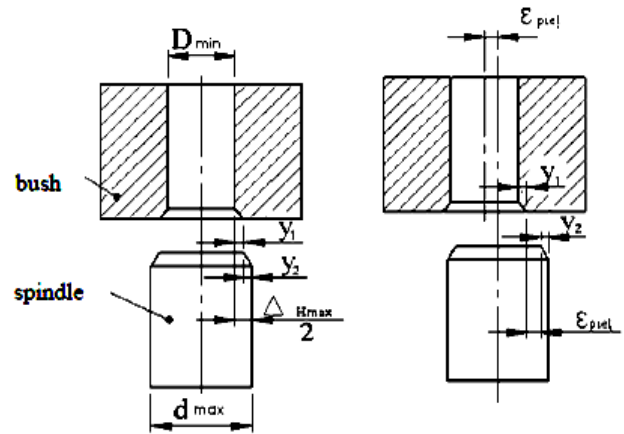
Scheme of the mutual layout of axes for spindle and bush
